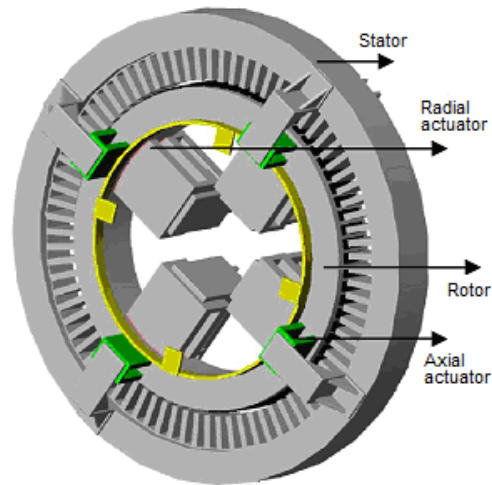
View of the magnetic bearing setup for an iron-cored RF PMDD generator [120]
